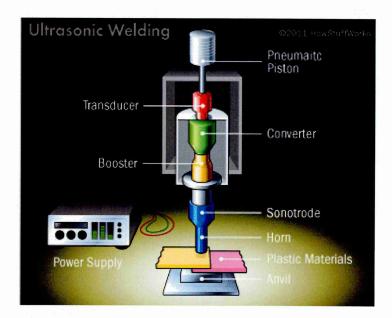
Static Ultrasonic Welding Equipment (How Stuff Works 2013).
